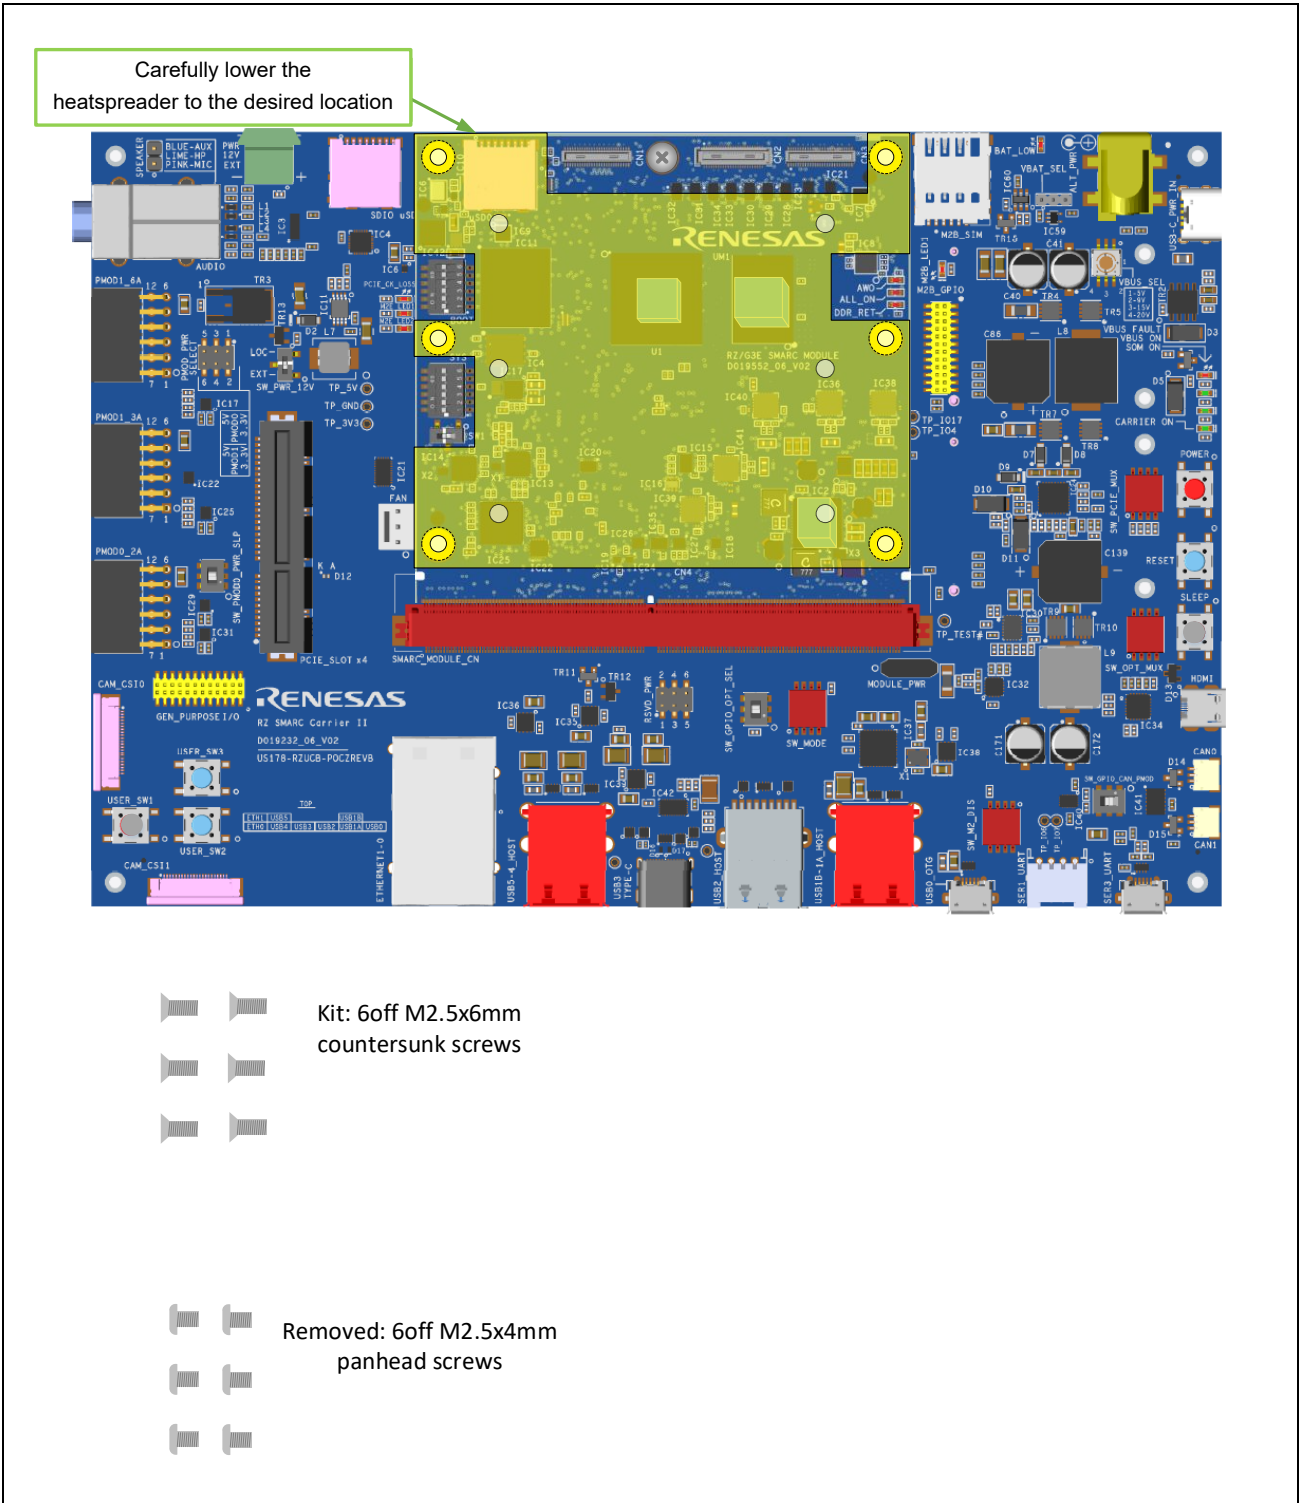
How to Install a Heatspreader on the G3E SMARC Module
